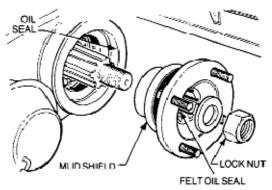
Output Shaft Cover Oils Seal Removal (Front)
